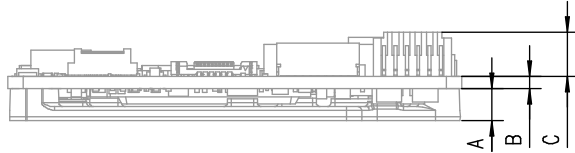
FETK-T4.0B Dimensions - Side View
